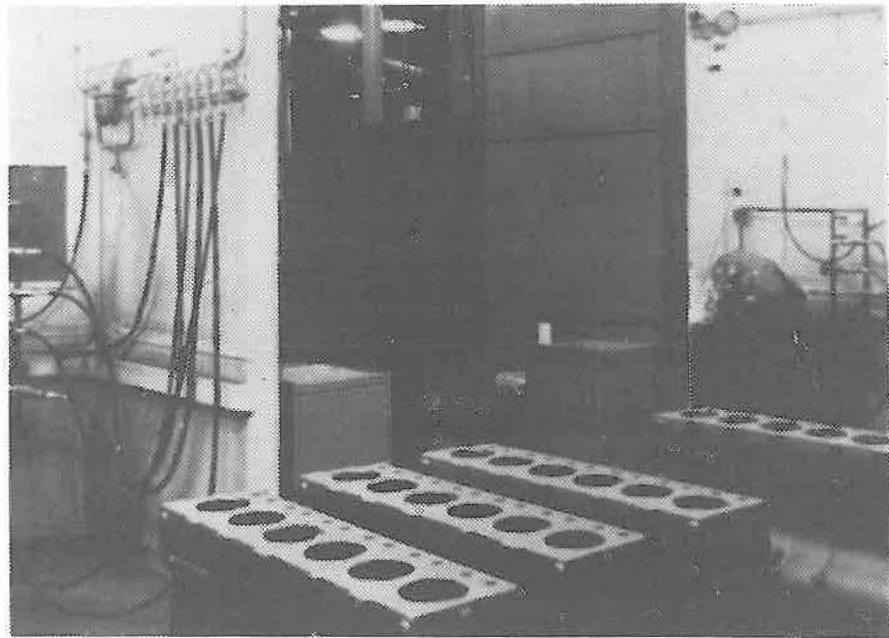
Hexagonal cleaning booth for cleaning of castings such as diesel engine blocks.
